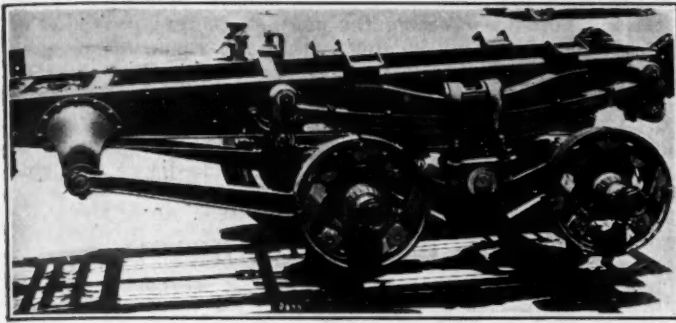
REAR CONSTRUCTION OF A 10-TON SIX-WHEEL TRUCK
